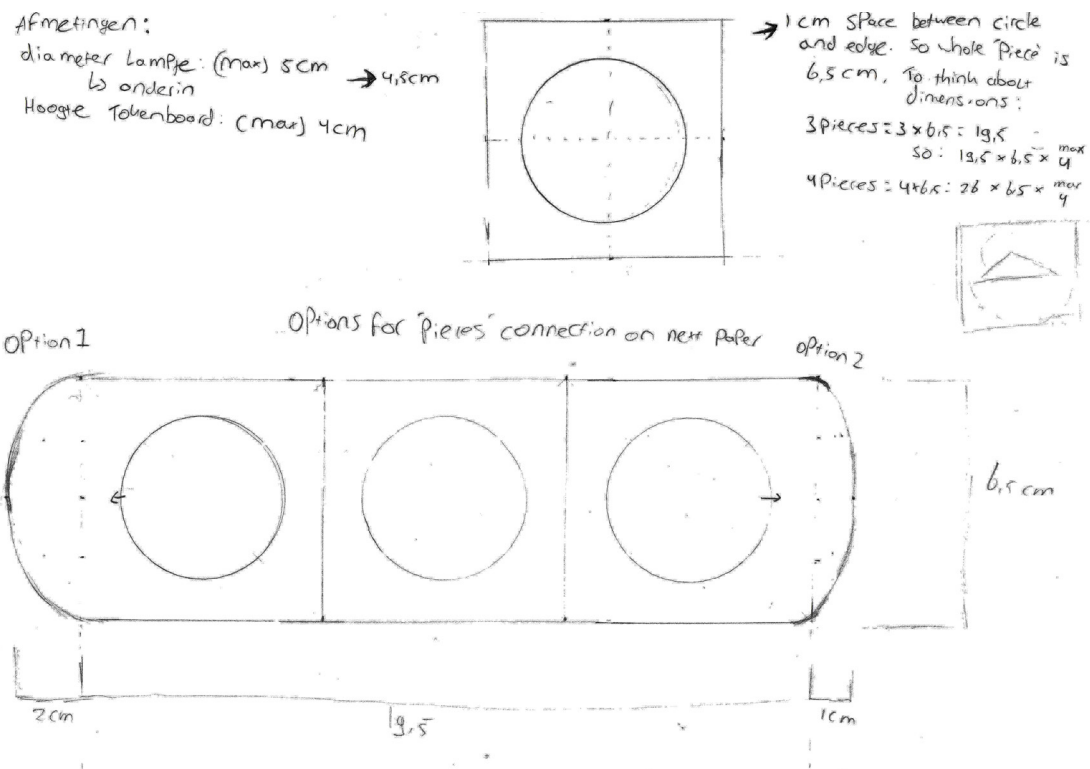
TOKEN BOARD PROTOTYPING PLAN
